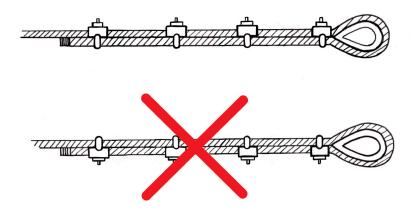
Position of cable grips for fixing cable (number of cable grips depends on cable diameter)
